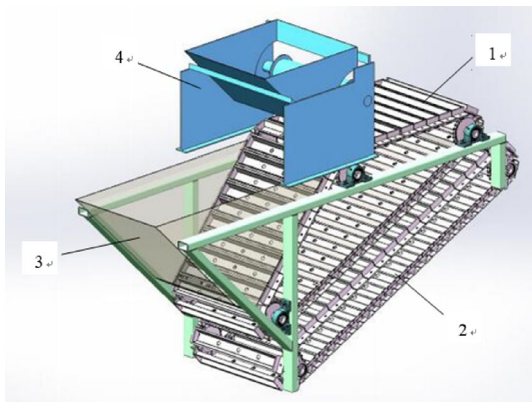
Structure of the seeding unit. 1 primary lifting conveyor chain, 2 secondary reversing conveyor chain, 3 sugarcane collecting box, 4 seed compensator
